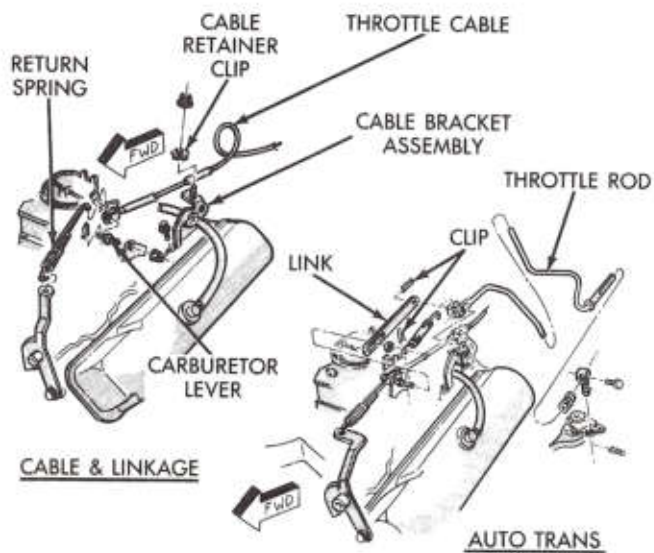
Throttle Cable Attachment 3.9L and 5.2L Engines
